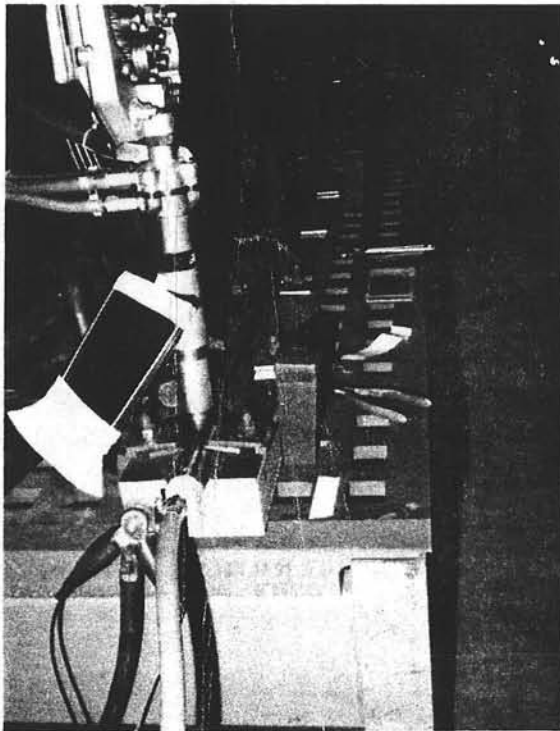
WELD DEPOSIT BEAD SIZE
